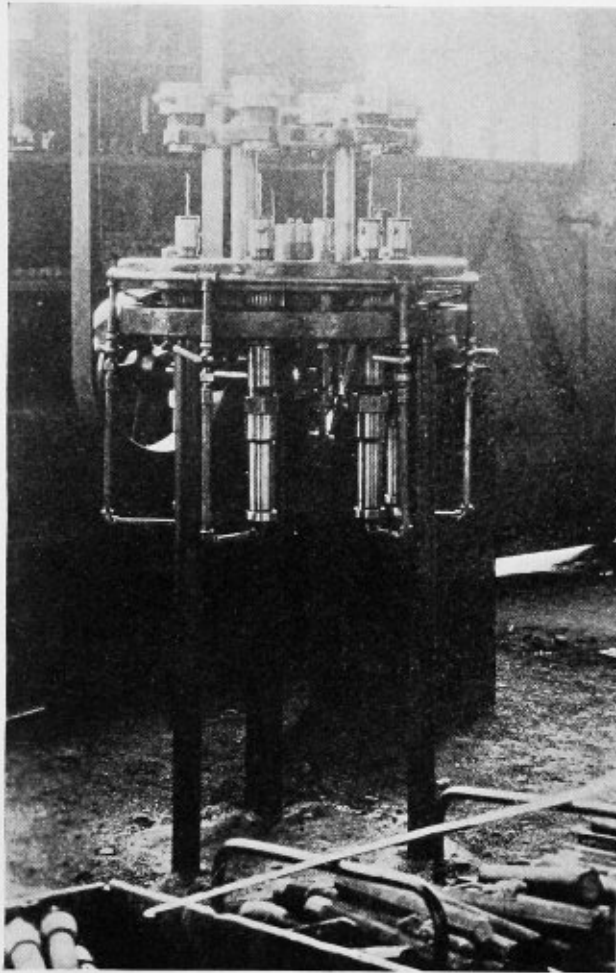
Special Five-Spindle Drilling Machine for Drilling Telltale Holes in Staybolts
